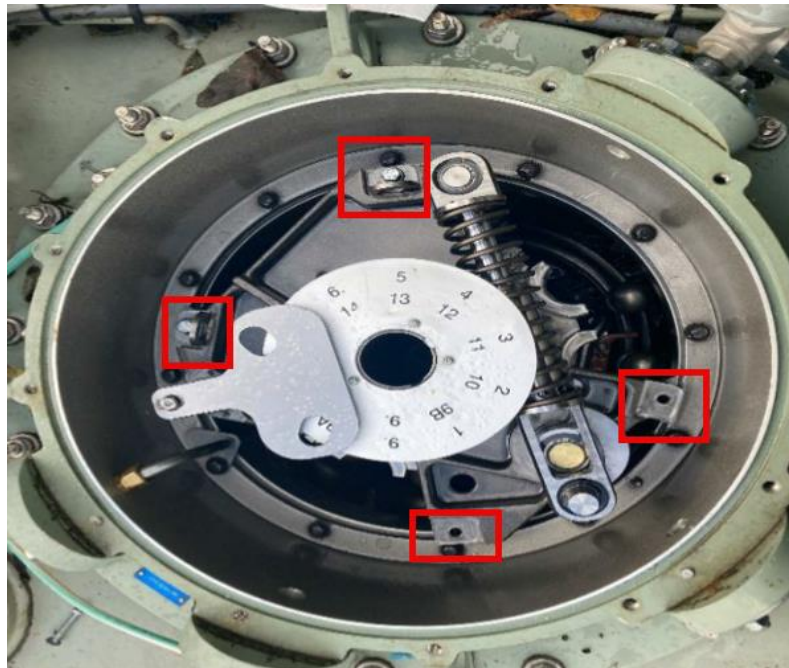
Photo of VUBB with top cover removed, two lifting lugs missing.
